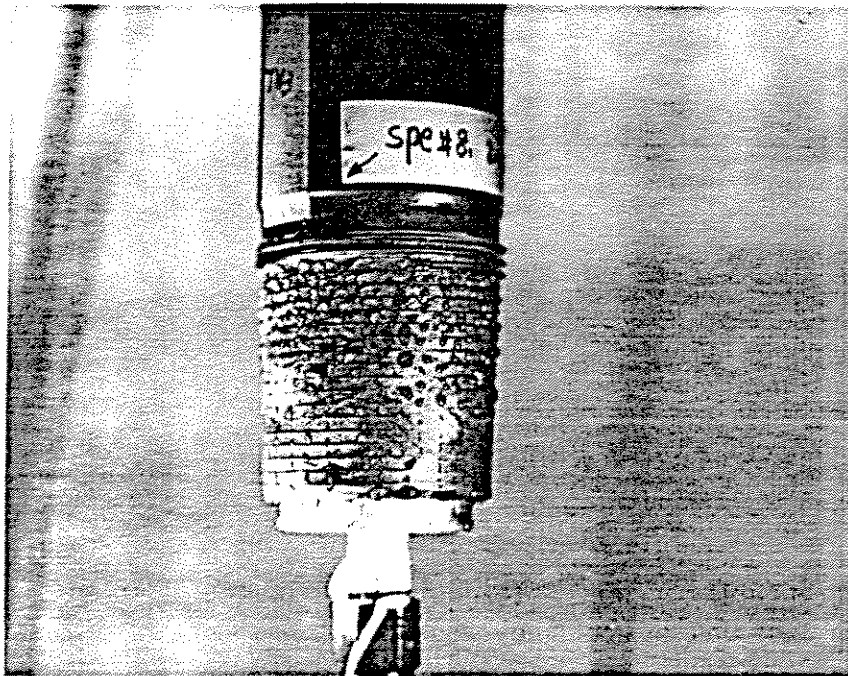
Leakage Test of Damaged (Pin Section) Tube Body
